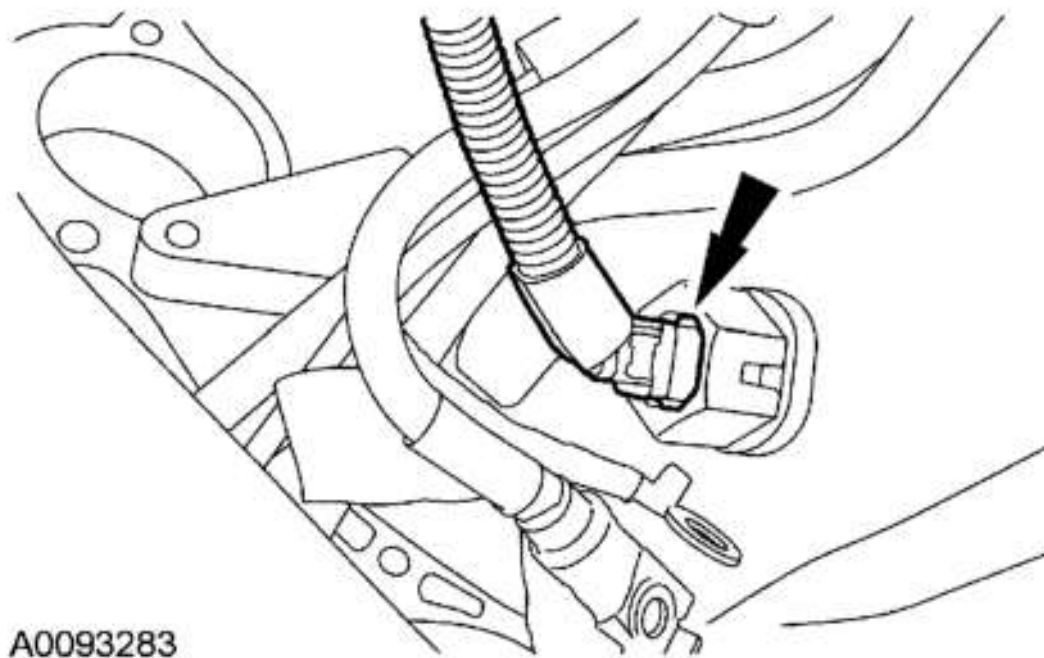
Disconnecting Engine Oil Level Sensor Electrical Connector
